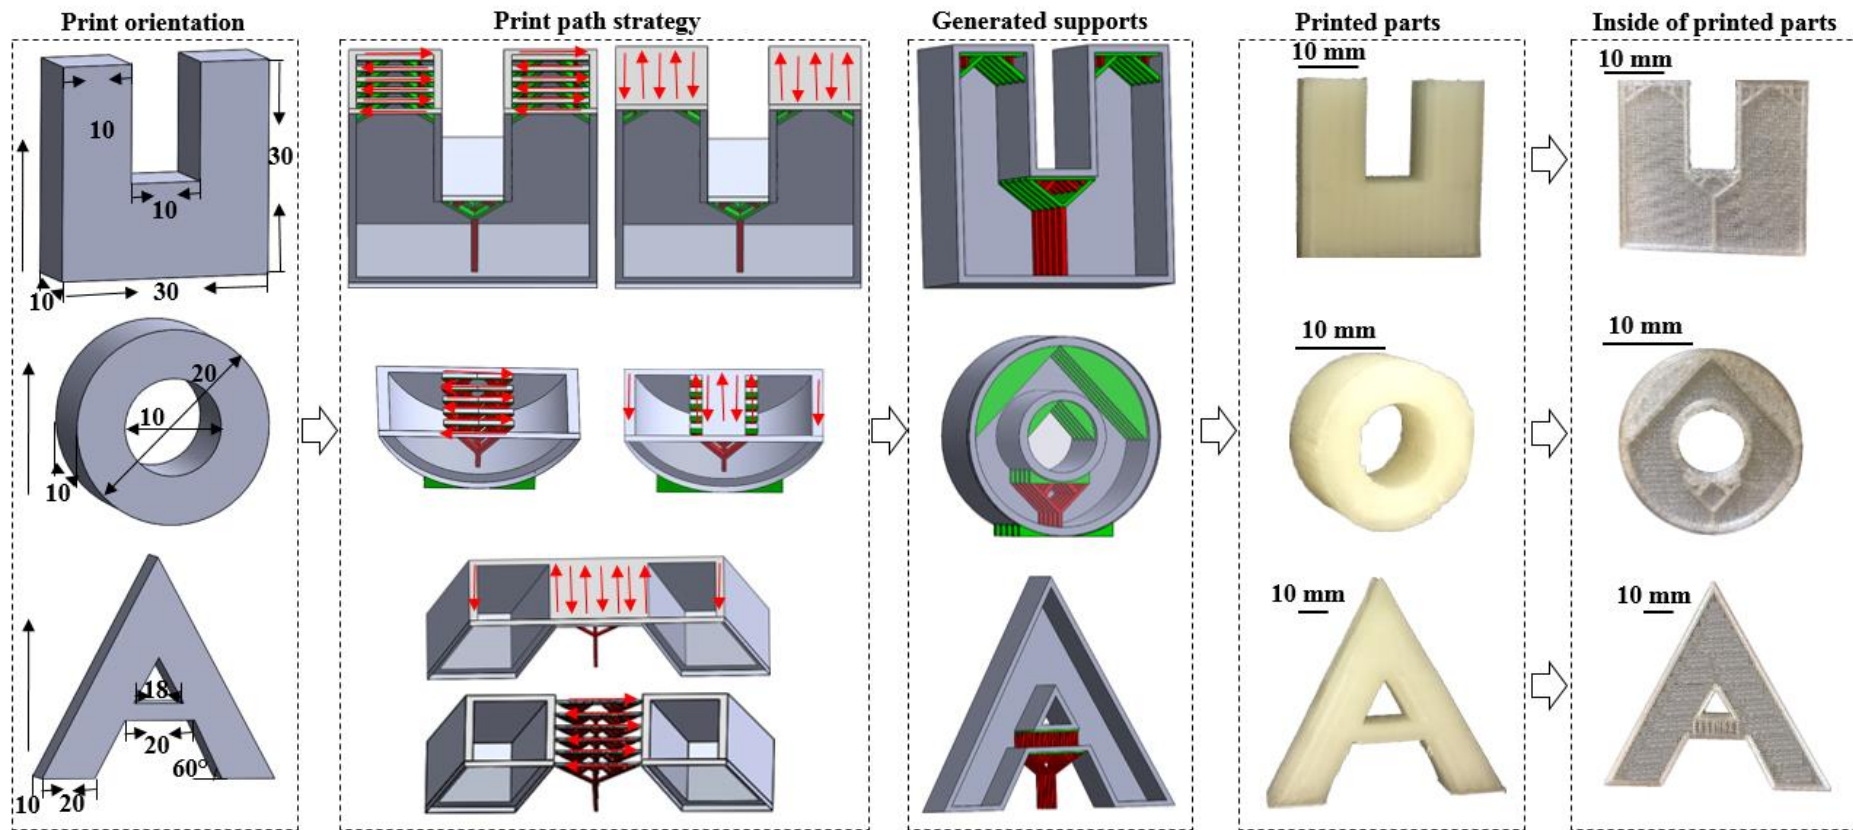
Best strategies for fabricating "U", "O" and "A" parts and their dimensions (Unit: mm), as well as corresponding generated supports and printed parts
